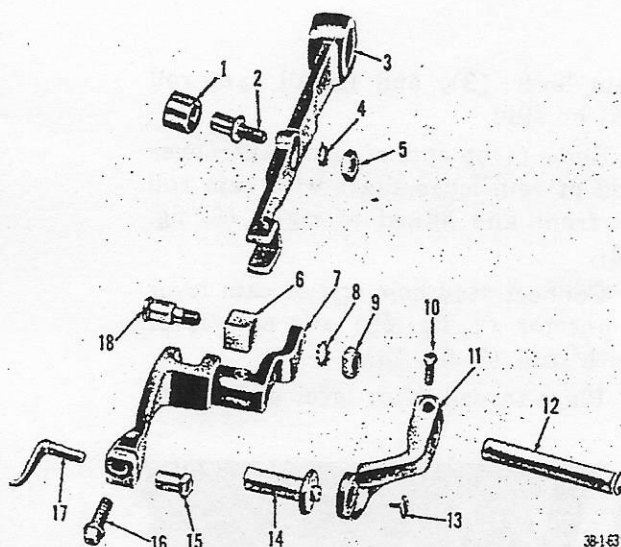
Presserfoot cam lever and bar adjusting sleeve block assembly installed.
